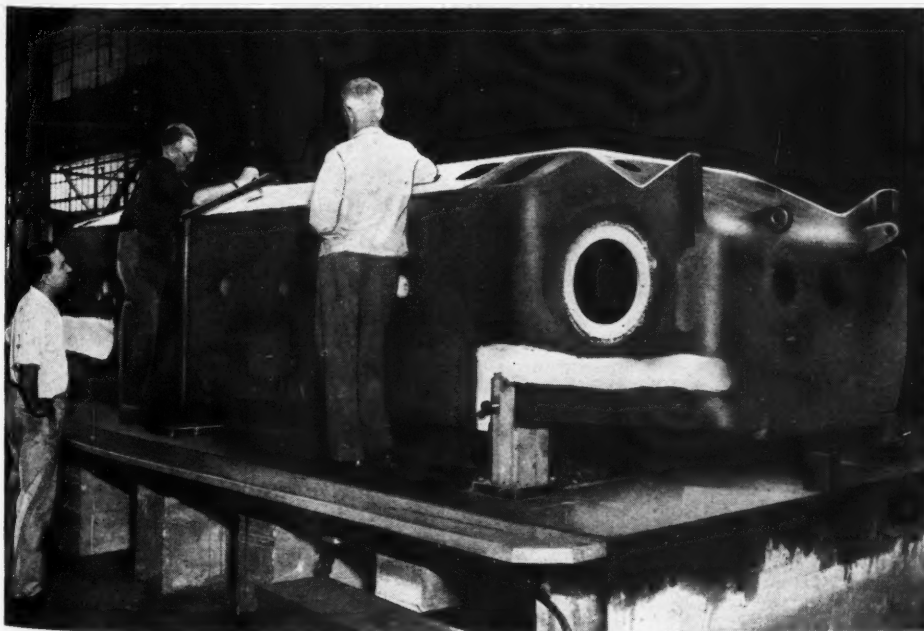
Inspecting and laying out a finish-welded tank hull on a large surface plate. This operation is performed by a crew of three men
